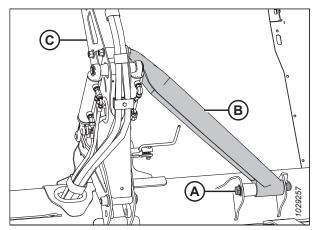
Center Support Arm – Double Reel Shown, Triple Reel is Similar
